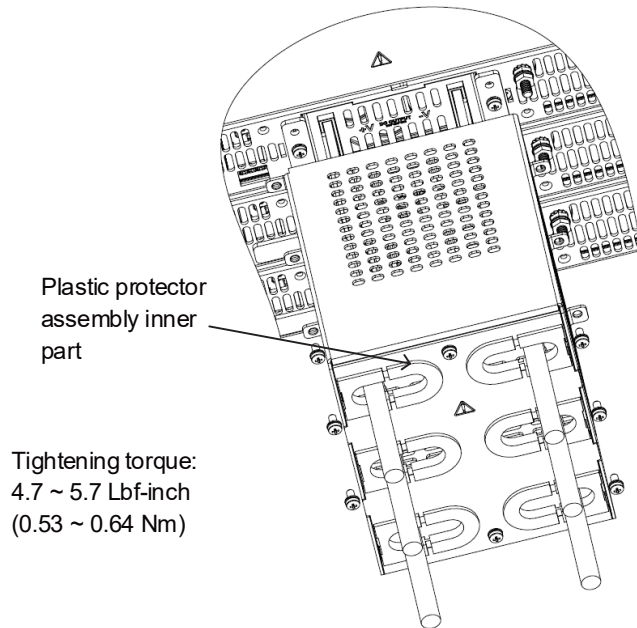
Assembly of 50V - 100V Wires Protection Cover
